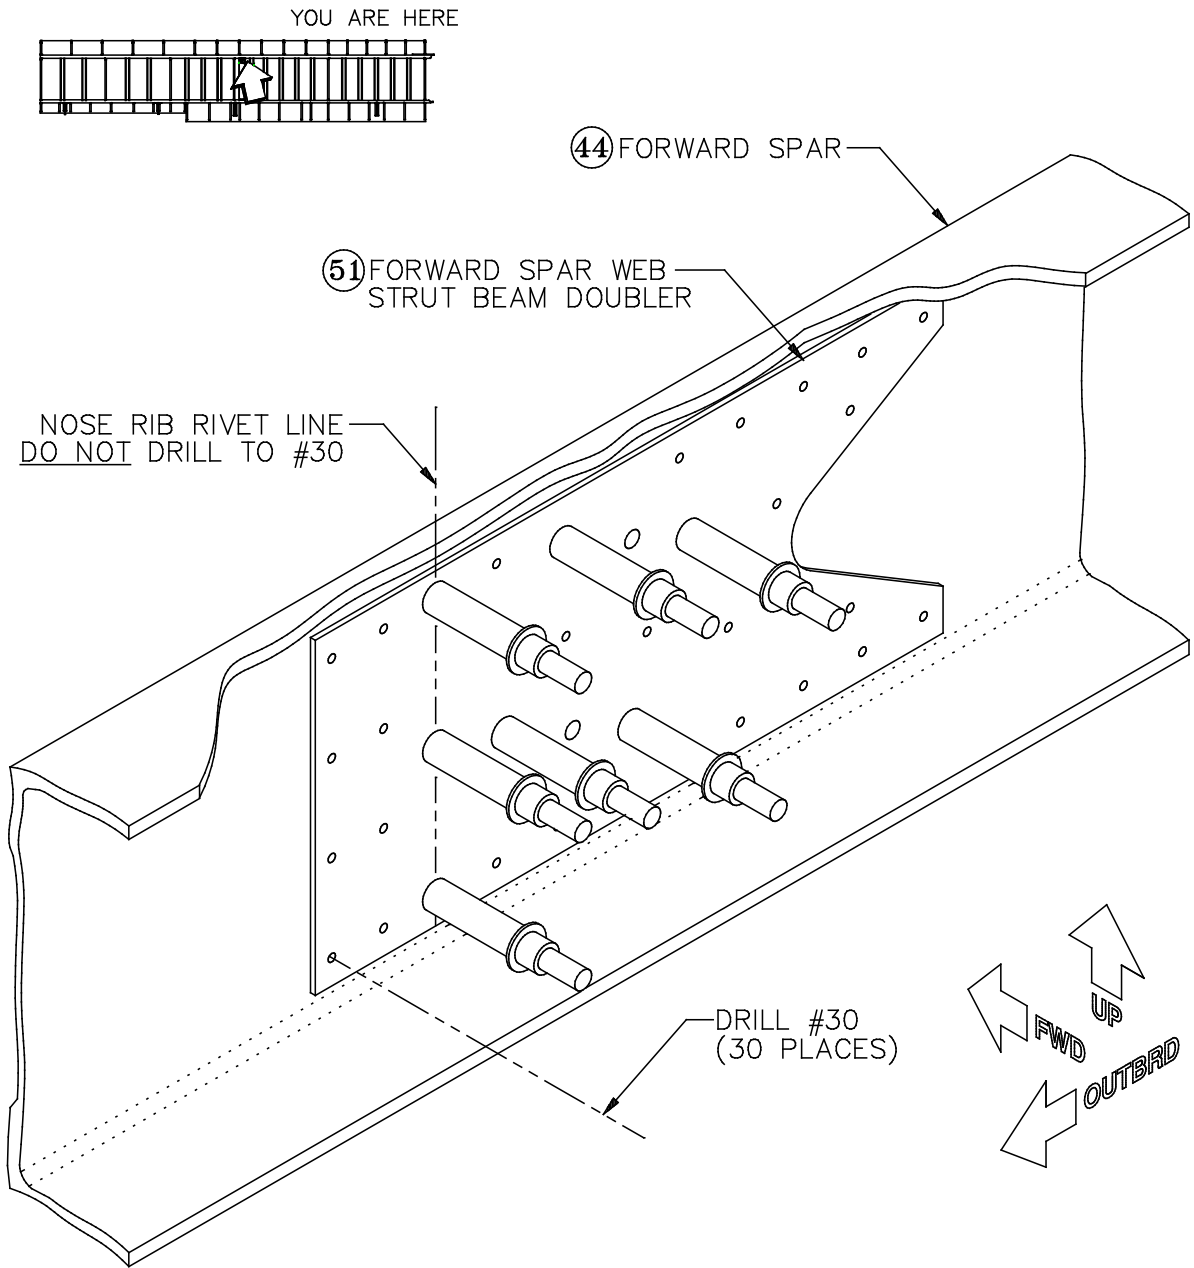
Drilling the Forward Spar Web/Strut Beam Doubler Assembly
